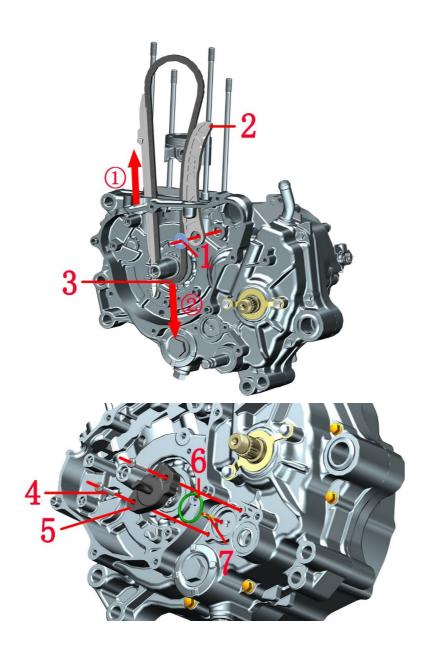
LEFT CRANKCASE		ZT158MJ Left crankshaft box assembly-2	СНК	(0)
